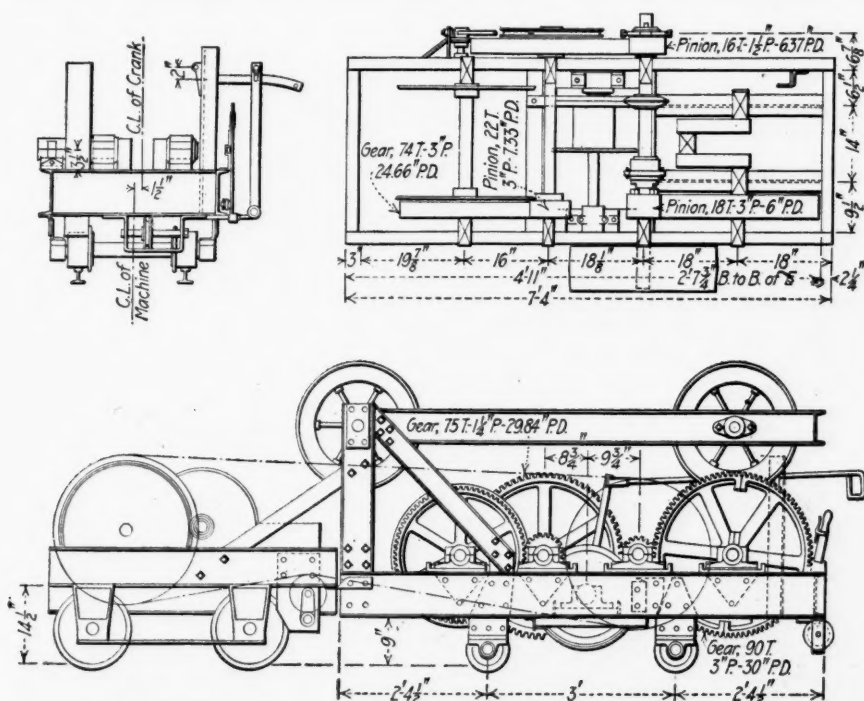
DETAILS OF THE REMODELED CHURN DRILLING MACHINE
